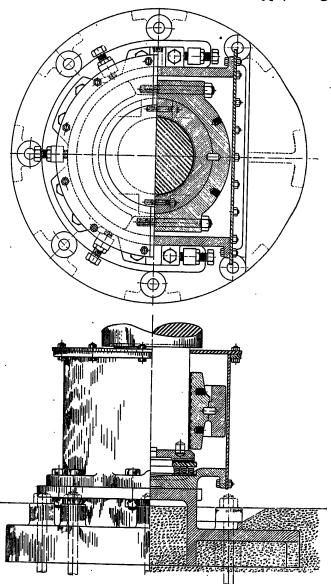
Enlarged Views. of Bearing of Motor Shown in
